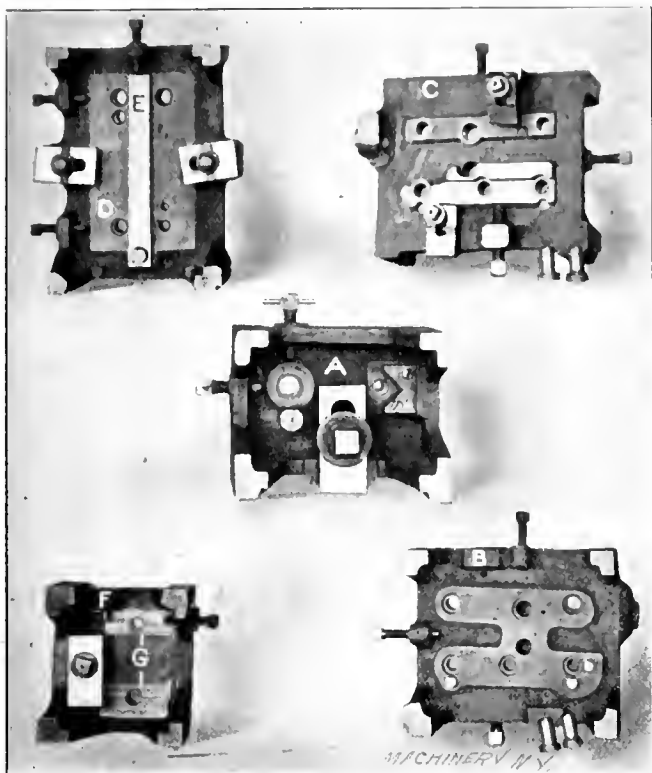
Miscellaneous Examples of Open Drill Jigs.
